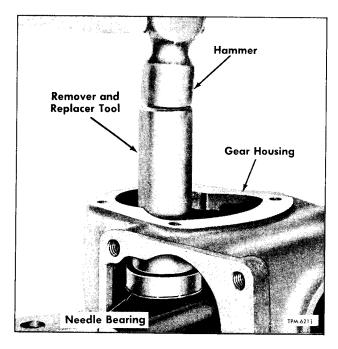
Removing or Installing Needle Bearing in Housing (Typical)
